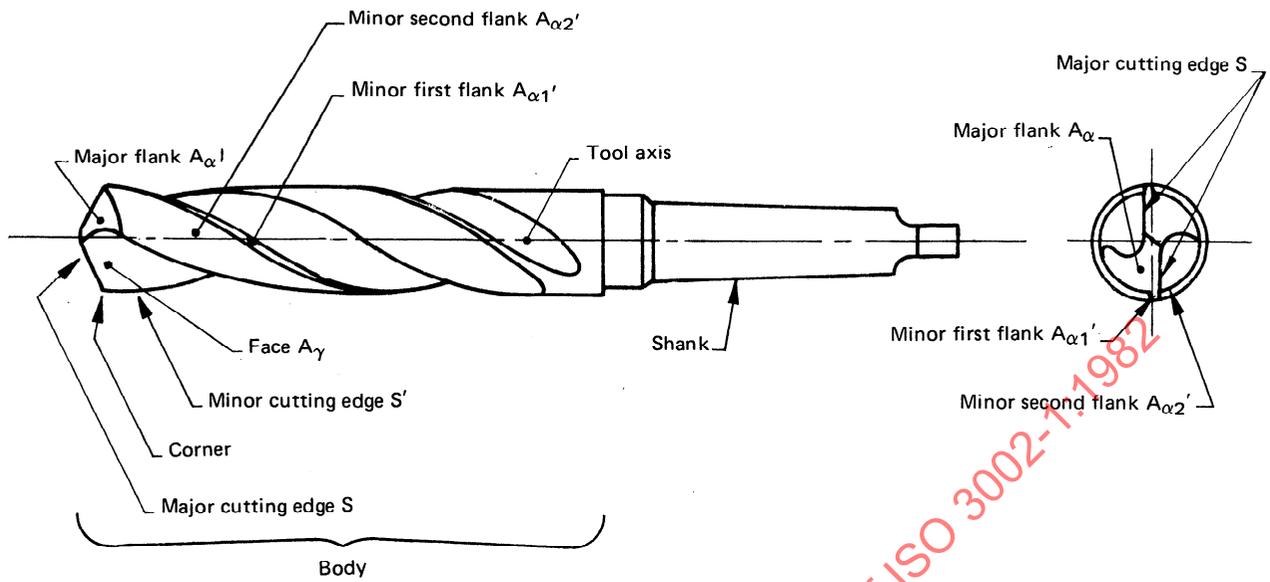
Cutting edges and surfaces on the cutting part of a twist drill
